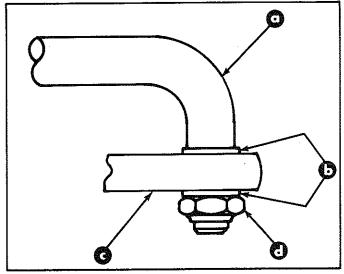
Dual Steering Cable - Single Engine Attaching Kit Installed
